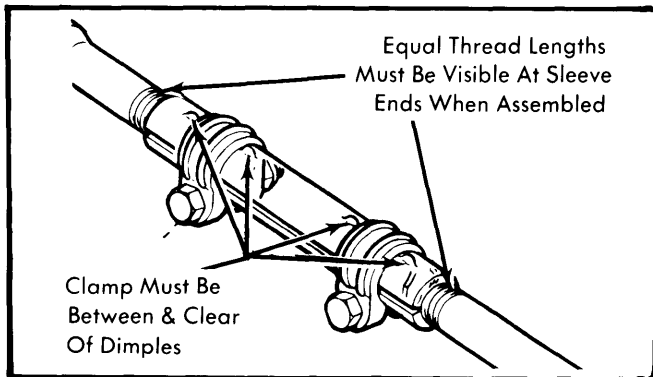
Tie Rod Clamps Between Dimples (General Motors Shown).
